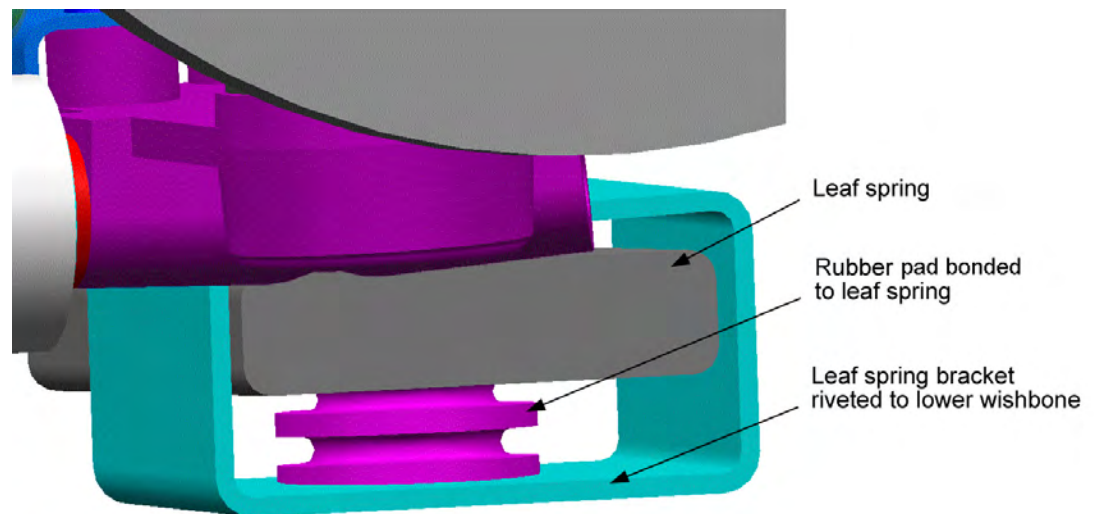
Leaf spring rubber pad in bracket
